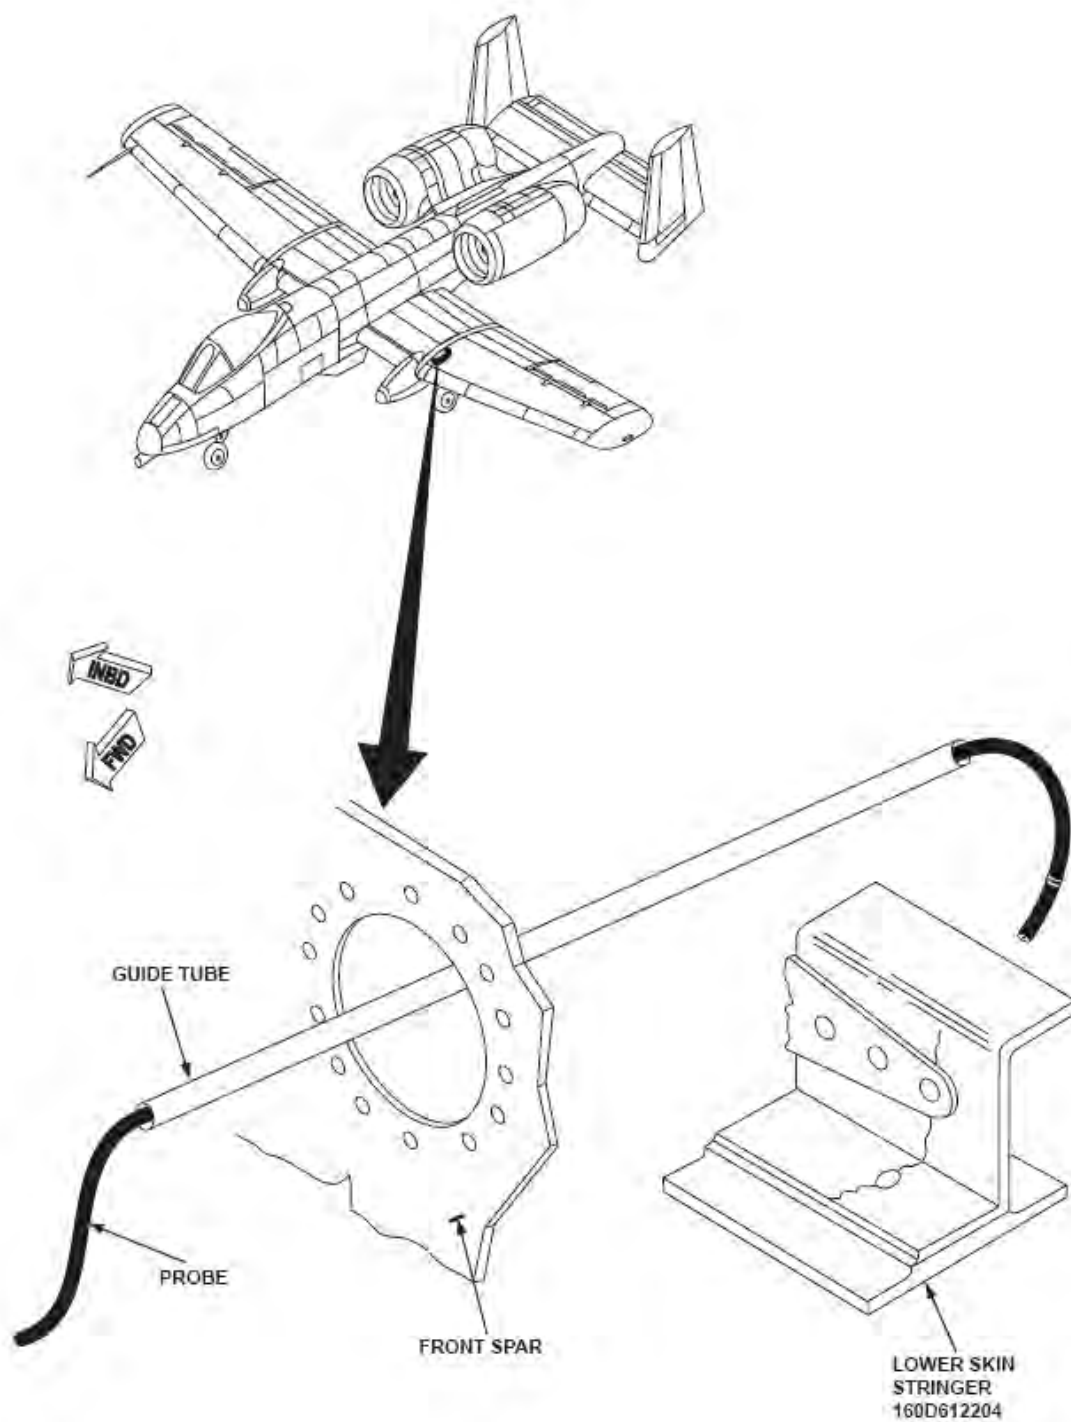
A-10 Inspection Required Under Stringer Flange.
